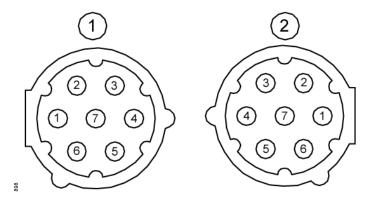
Connector (1 = rear view, solder terminals, 2 = front view, pins)
